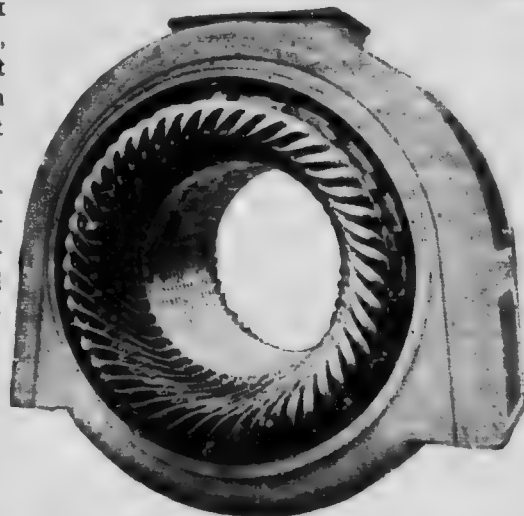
Completed B. T. H. Armature for 11,000 Volt Machine.
